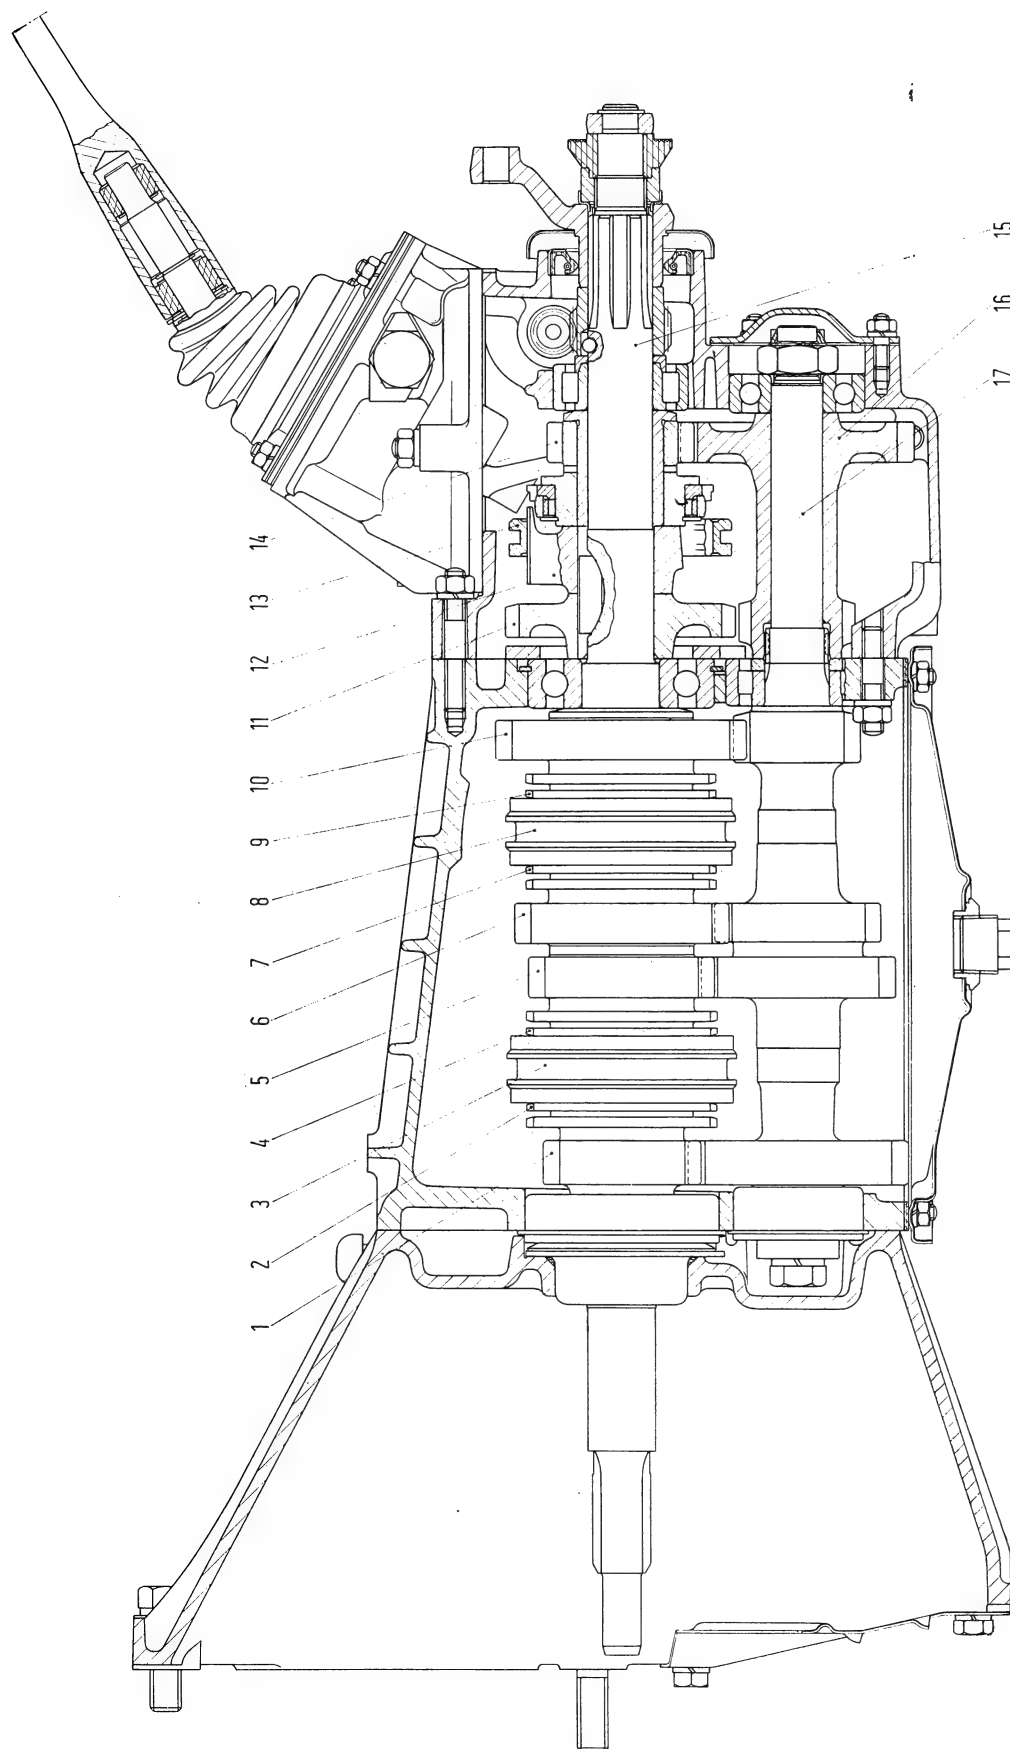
Side sectional view of 1500 Cabriolet transmission across overdrive and reverse gears. Transmission to suit 1600 S Cabriolet differs from the assembly shown here above in the maincase and bell housing design.
